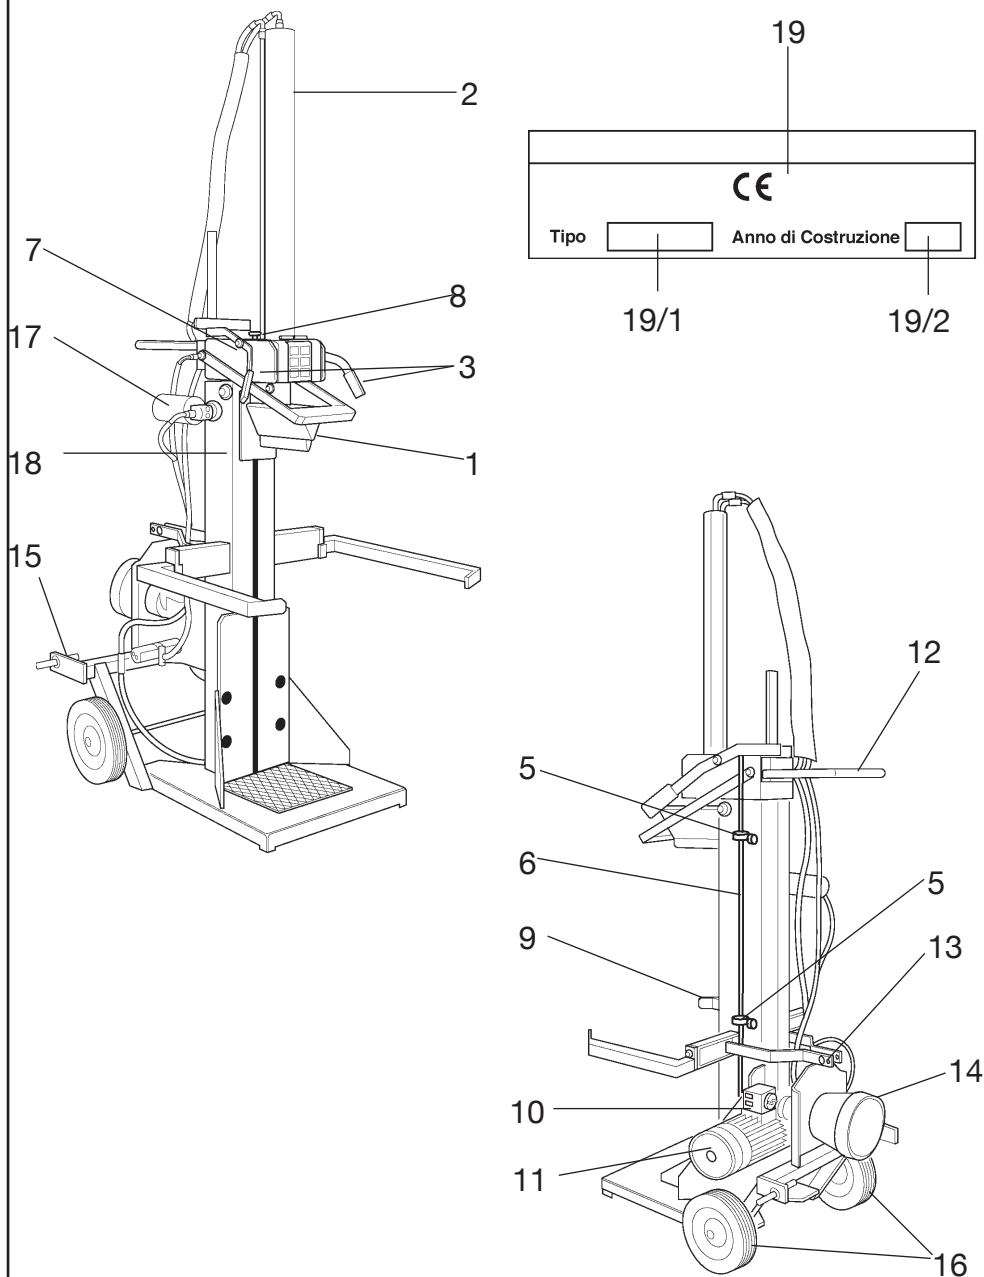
Electrically operated Wood-cutter, Mod. 110+PTO with a three-point coupling to the tractor (this is the most complete version).
